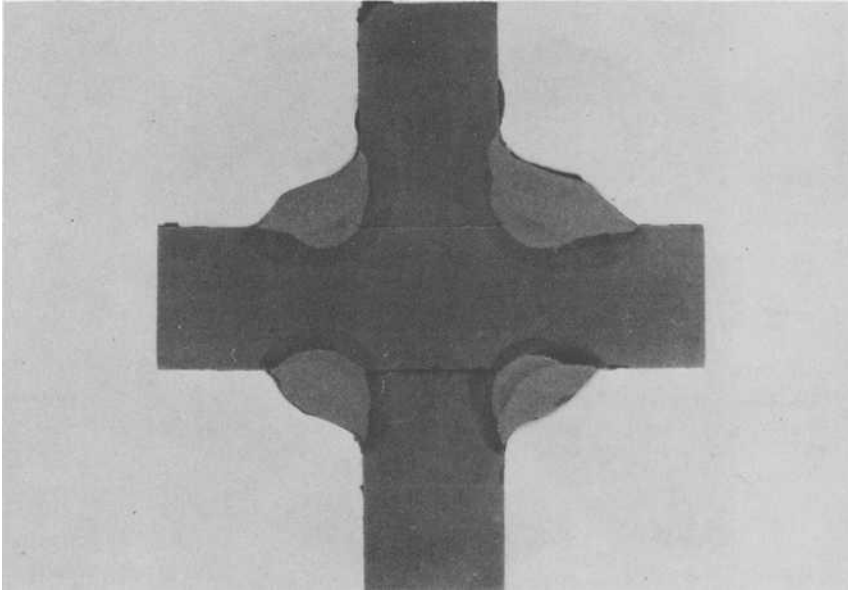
Welded joints—cruciform joints—after grinding the weld toe.
